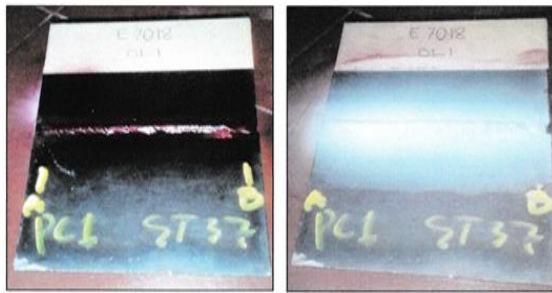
Inspection of weld defects by Dye Penetrant Testing method, Material ST 37, with oil cooling medium
